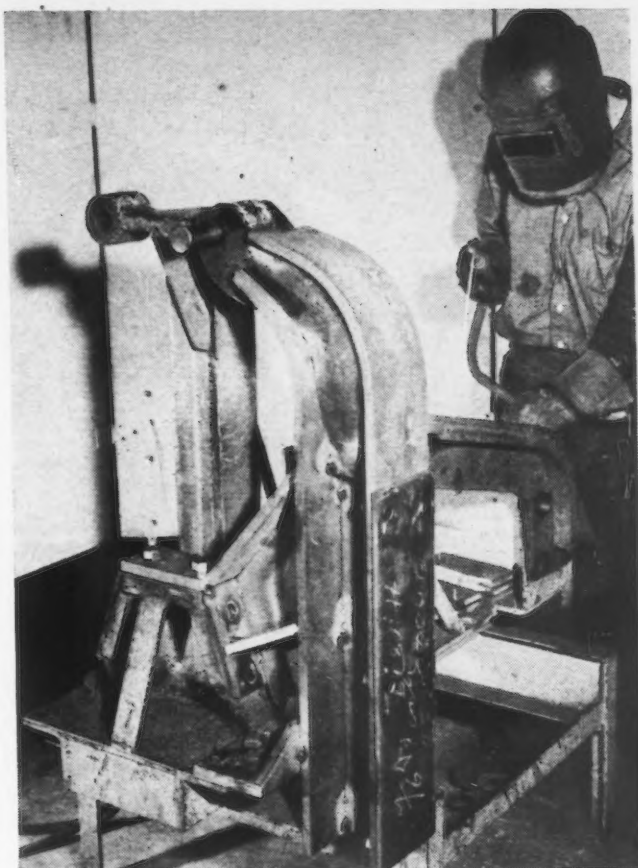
Tack welding hydraulic cylinder carrying bracket. Jig is designed to accommodate both right and left hand brackets.
